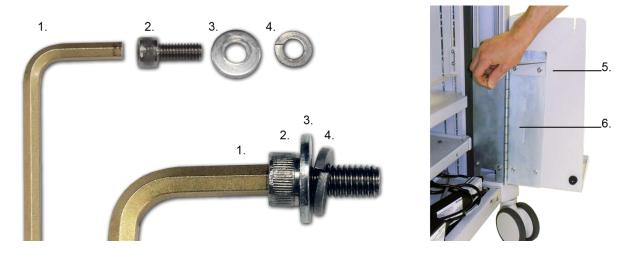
(1) 5 mm Hex Key; (2) Socket Head Cap Screw (3) Flat Washer; (4) Lock Washer; (5) Bracket; and (6) Hinge Leaf.
